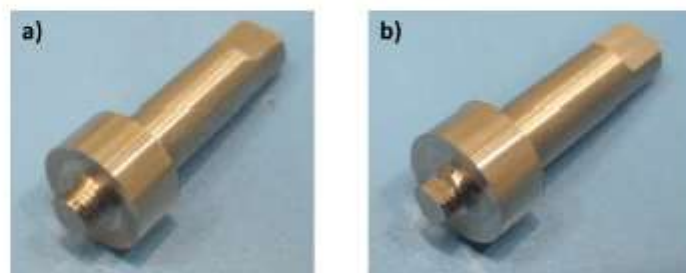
FSW tools used to produce the welds. a) conventional threaded tool and b) tool with 3 flats
